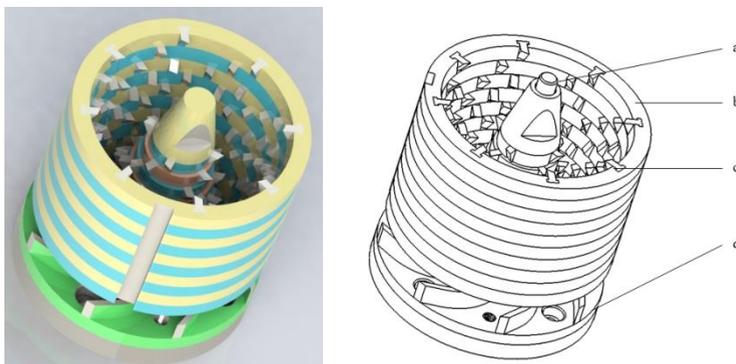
General view of the shredder for polymers; a) movable shaft with set of rings and knives, b) set of fixed rings with knives, c) one of many replaceable knives, d) bottom shield connected to the movable shaft and equipped with overturn elements.
